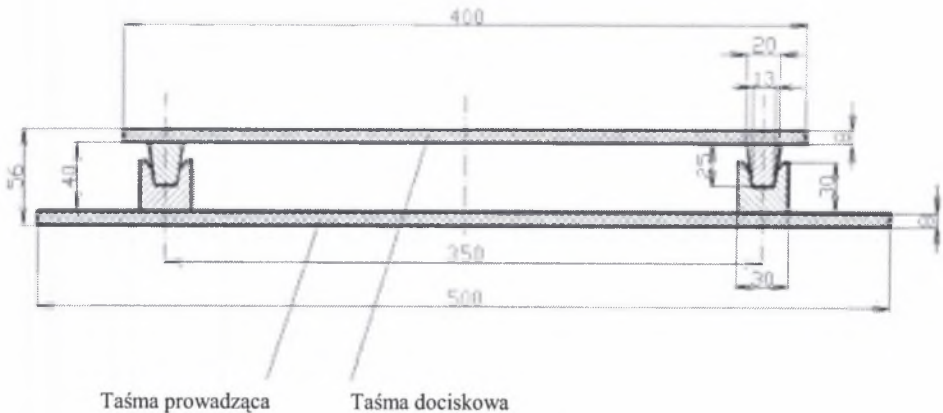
Steep belt conveyor's model with belt with sills mechanically fixed
